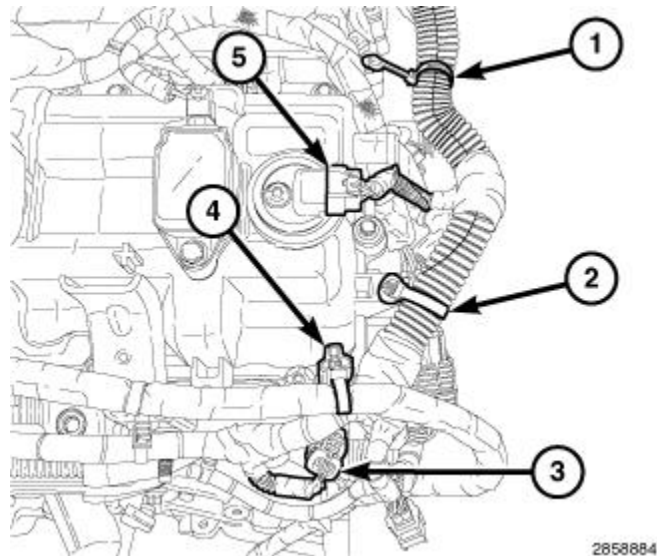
ECT Sensor Connector, CMP Sensor & Main Wire Harness Retainers
